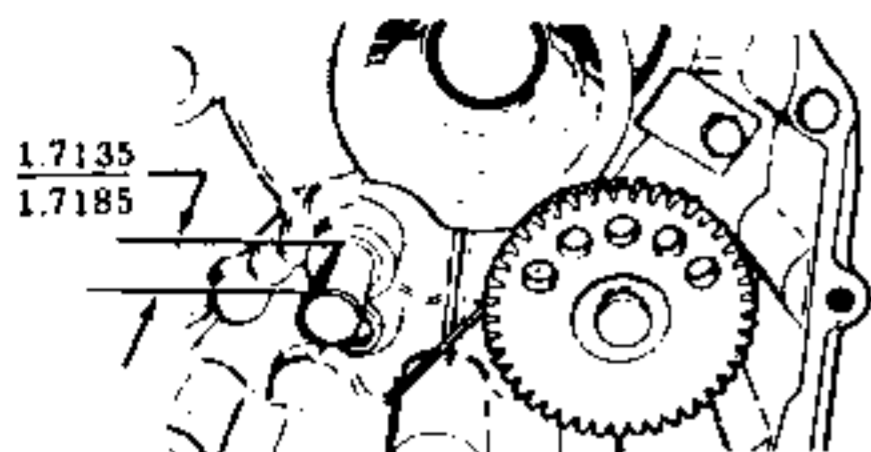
On Models HH80, HH100 and HH120, press balancer gear shafts into cover to dimension shown.
